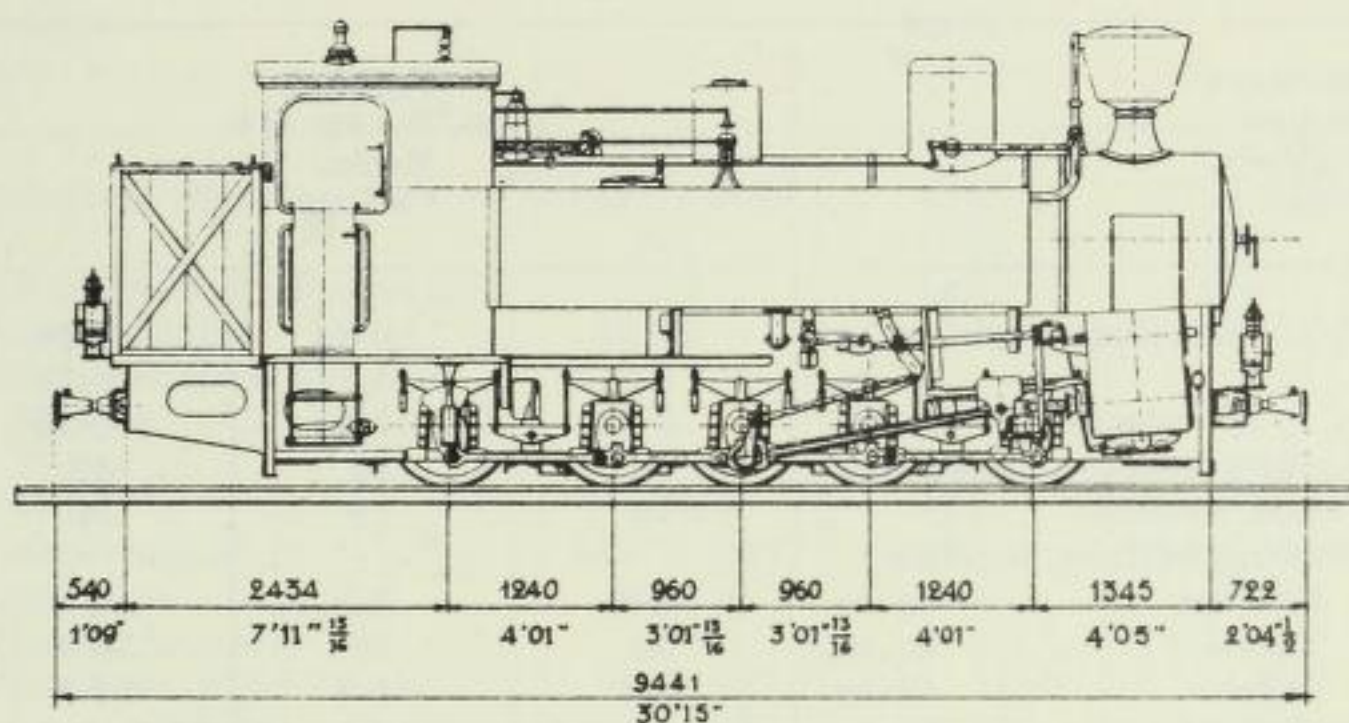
0-10-0 Tank Locomotive with Klien-Lindner Axles, Steinbeis Co., Bosnia.
